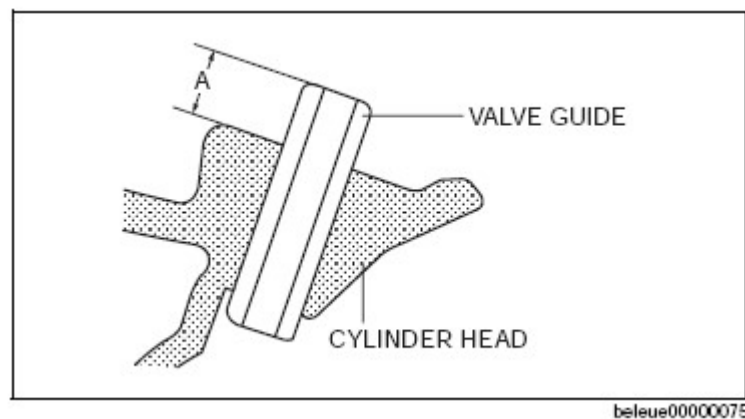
Measuring Protrusion Height (Dimension A) Of Valve Guide Without Lower Valve Spring Seat
